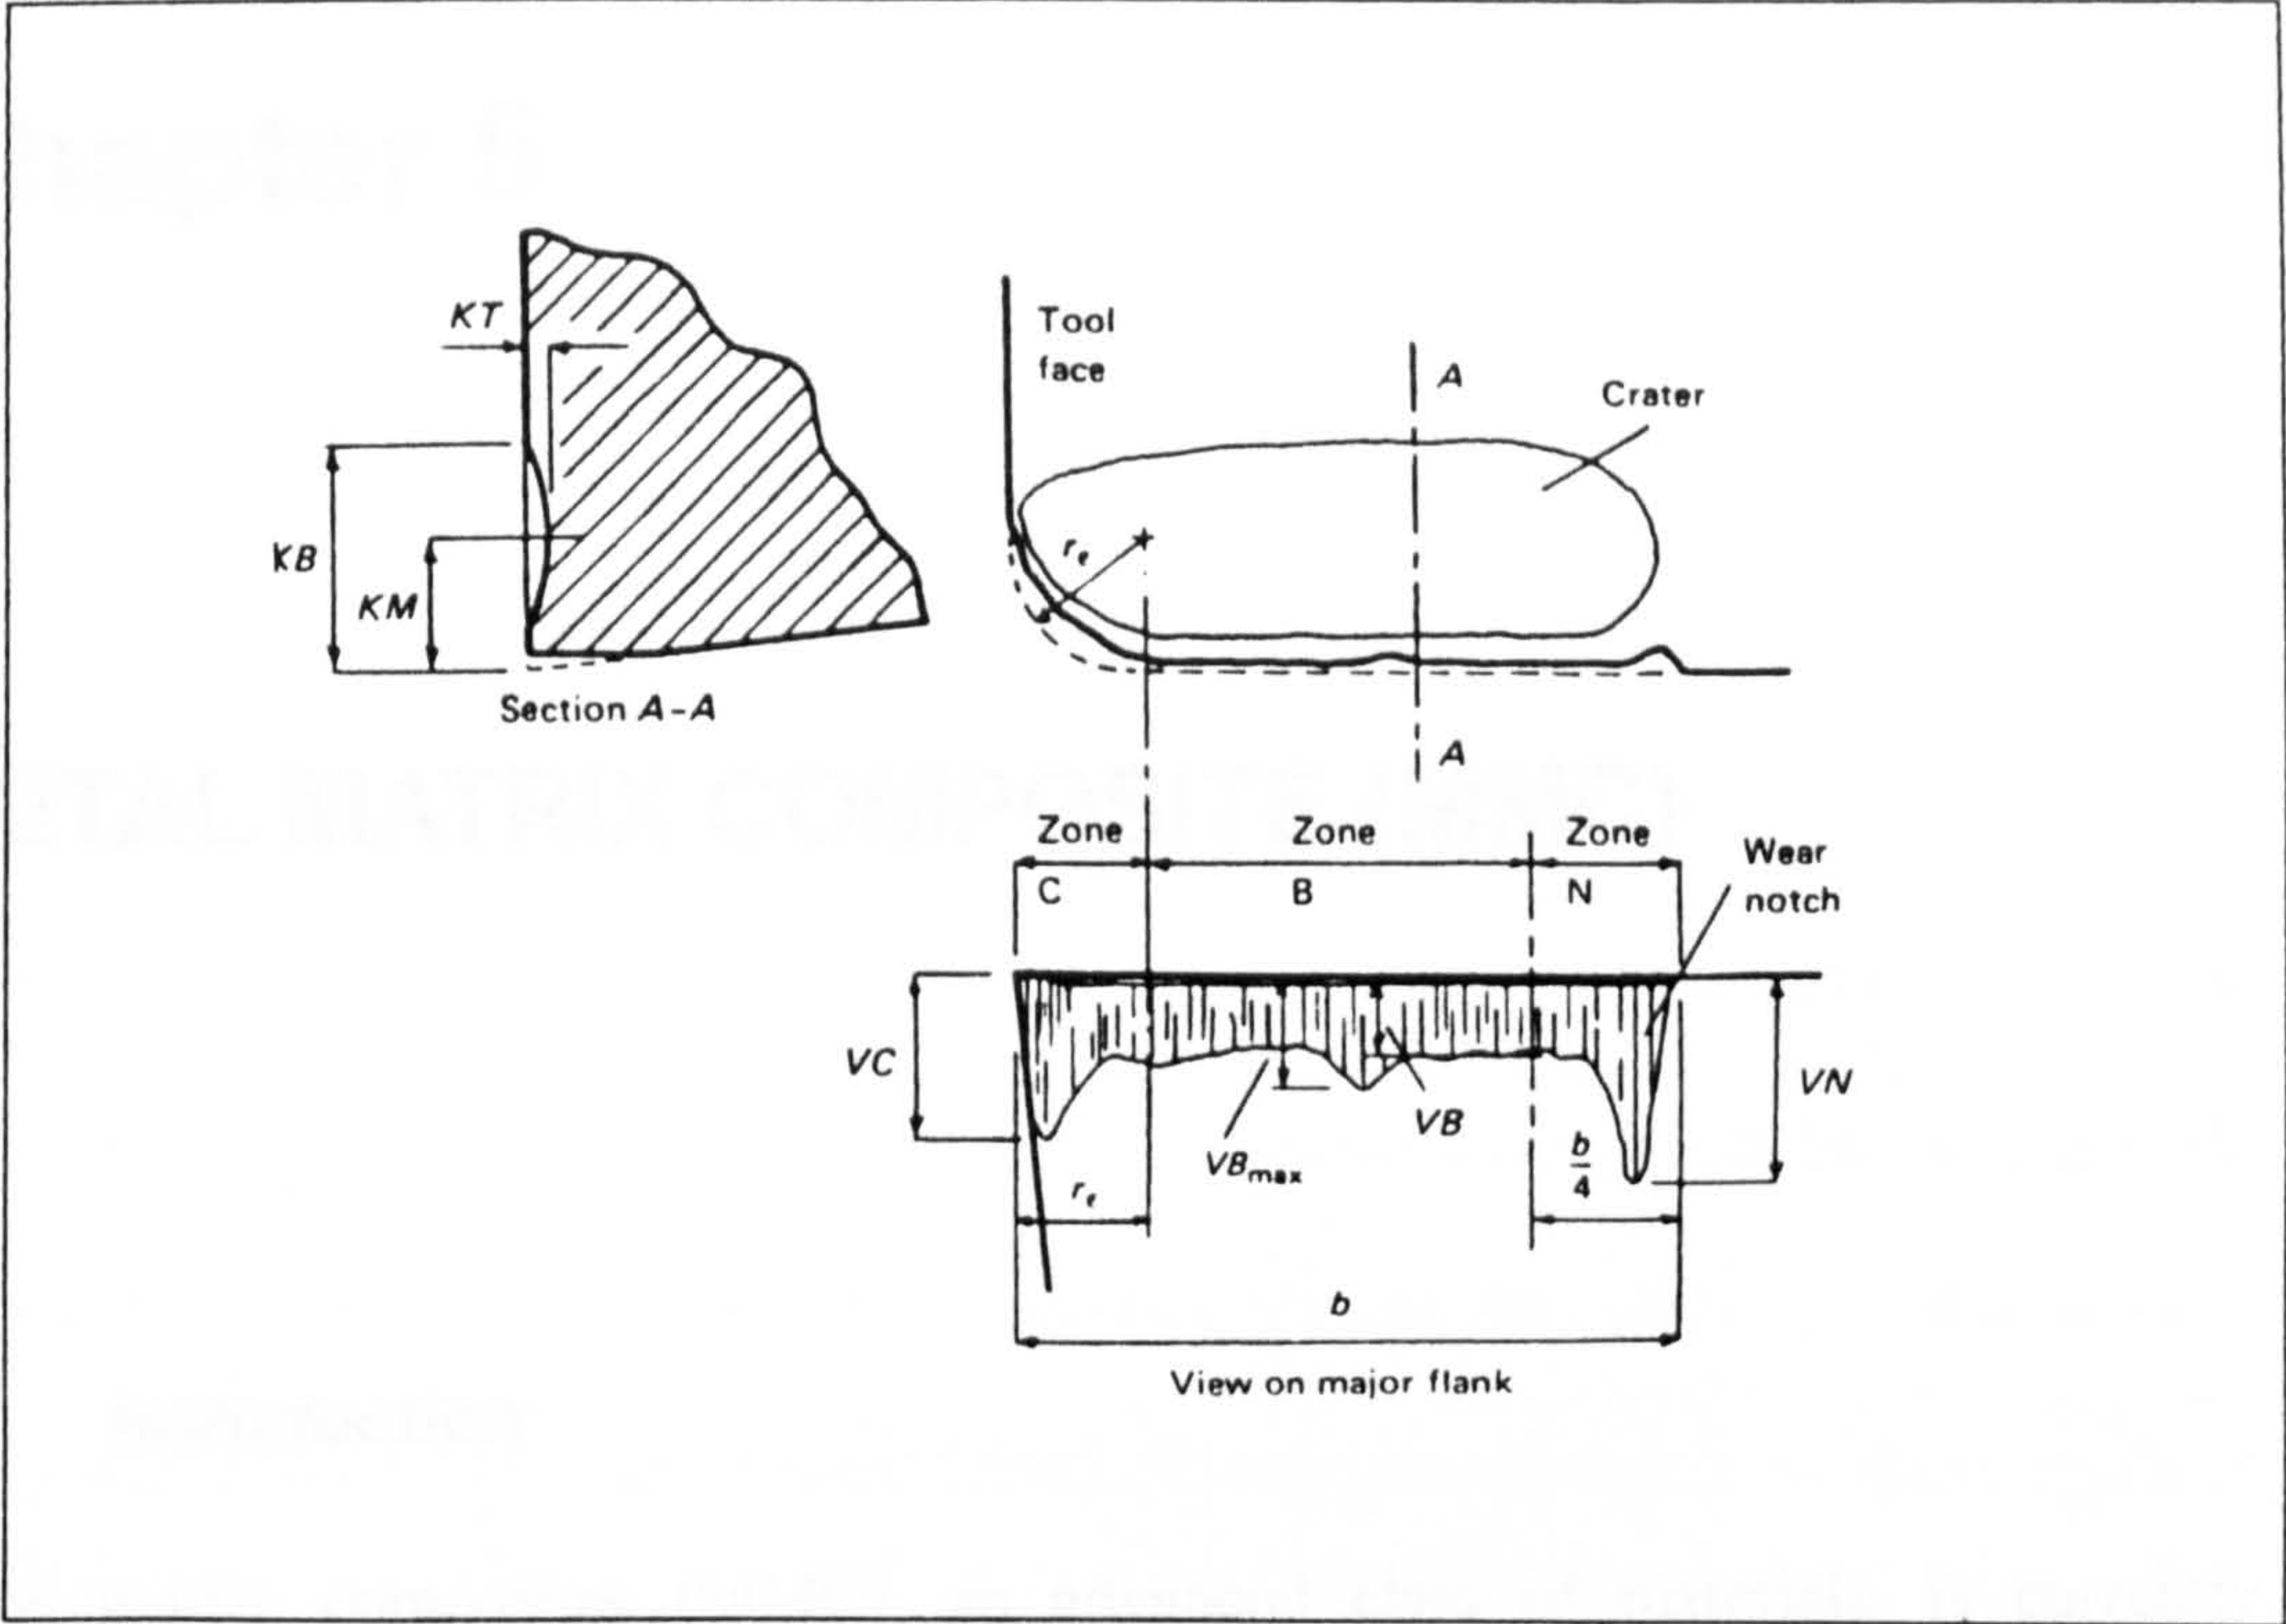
Measurement Of Flank Wear, Crater Wear And Notch Wear [20]
